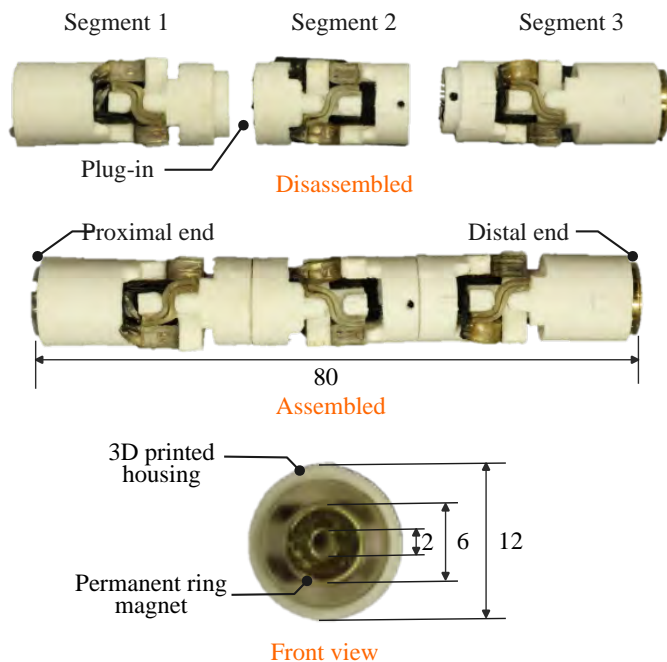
The prototype of the 6-degree-of-freedom manipulator is shown in a disassembled and assembled configuration using plug-in connections to achieve a modular assembly. The yokes and cross-link are 3D-printed with Acrylonitrile Butadiene Styrene. The front view displays the NdFeB ring-shaped magnet fixed at the distal end of the manipulator. At the proximal end, surgical tools can be inserted through a working channel. Dimensions are in mm.
